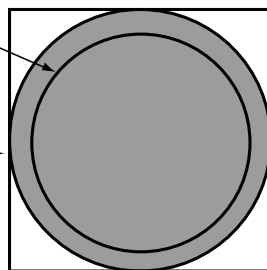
Footprint - 5 mils stencil -non solder mask defined
